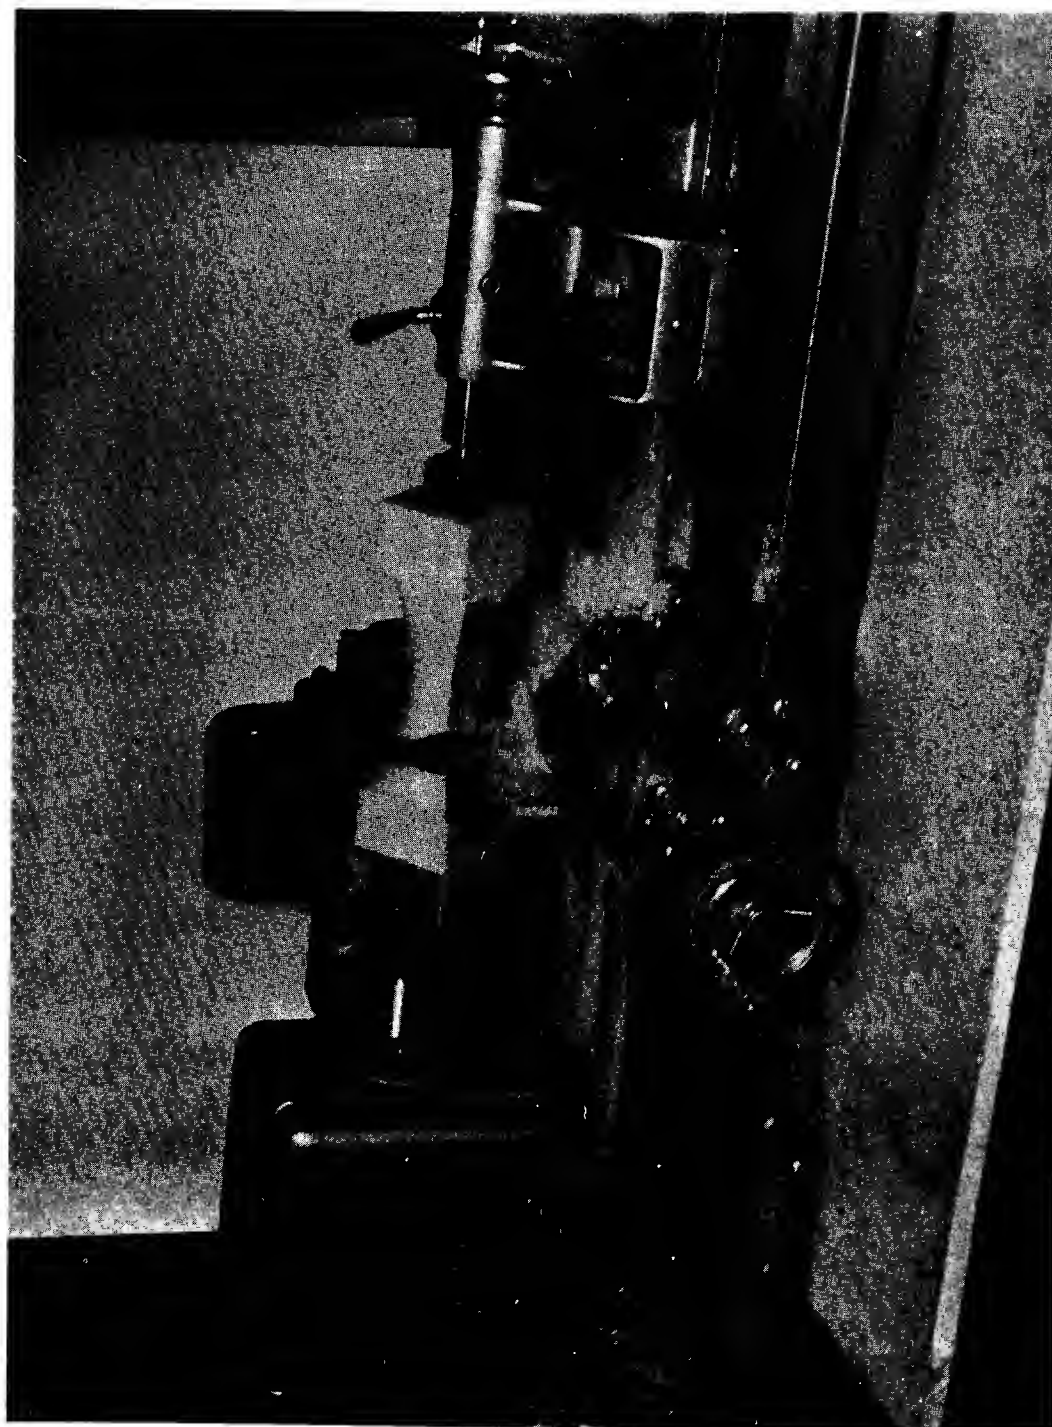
Lathe for Cutting Type A Rigid Tensile Specimens
